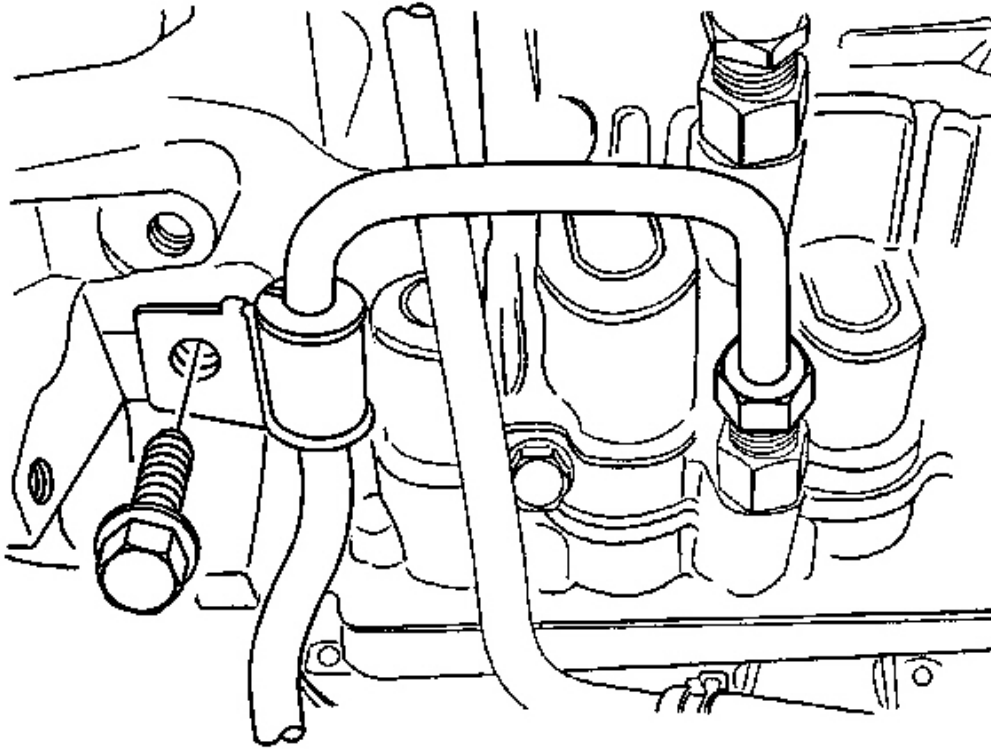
Rear Outlet Pipe, Clip, Bolt & Transaxle
